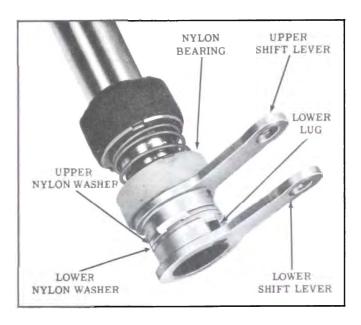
Control Shaft Assembly Ready to be Installed in Mast Jacket
